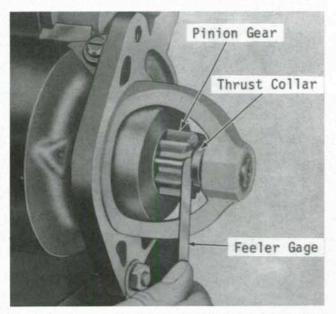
Measure starting motor drive pinion clearance with pinion engaged as shown.
